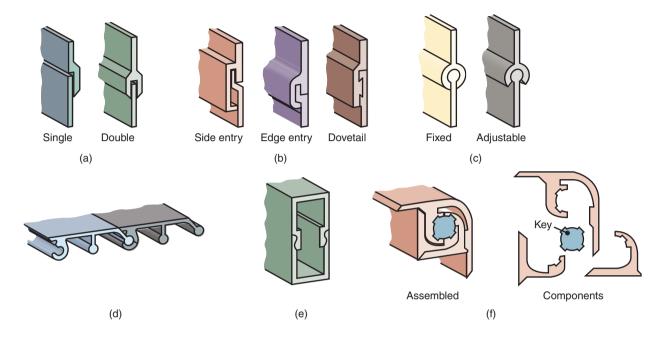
Examples of part geometries that allow assembly of extruded sections. (a) Lap joints; (b) laplock joints; (c) cylindrical sliding fits; (d) cylindrical sliding lock joints; (e) snap fit; (f) keyed assembly.
